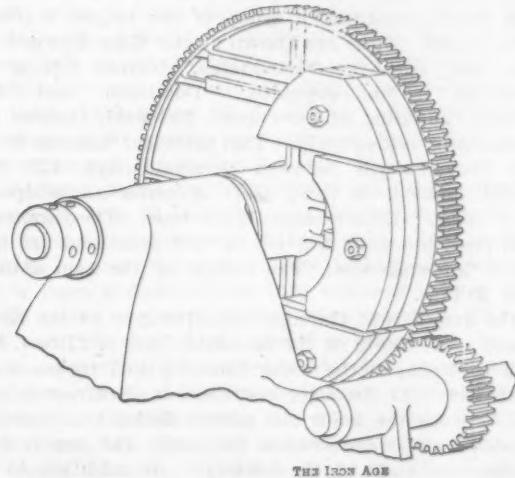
Rear View of End Driving Plate, Showing Movable Weights for Counterbalancing.
